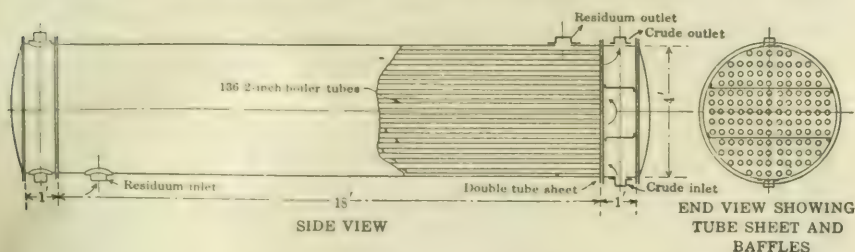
Forty-eight-inch condenser and heat exchanger. Trumble plant at Vernon. Left, side view; right, end view showing tube sheet and baffles. Outside surface of tubes, 1,280.3 square feet; inside surface of tubes, 1,157.9 square feet.
